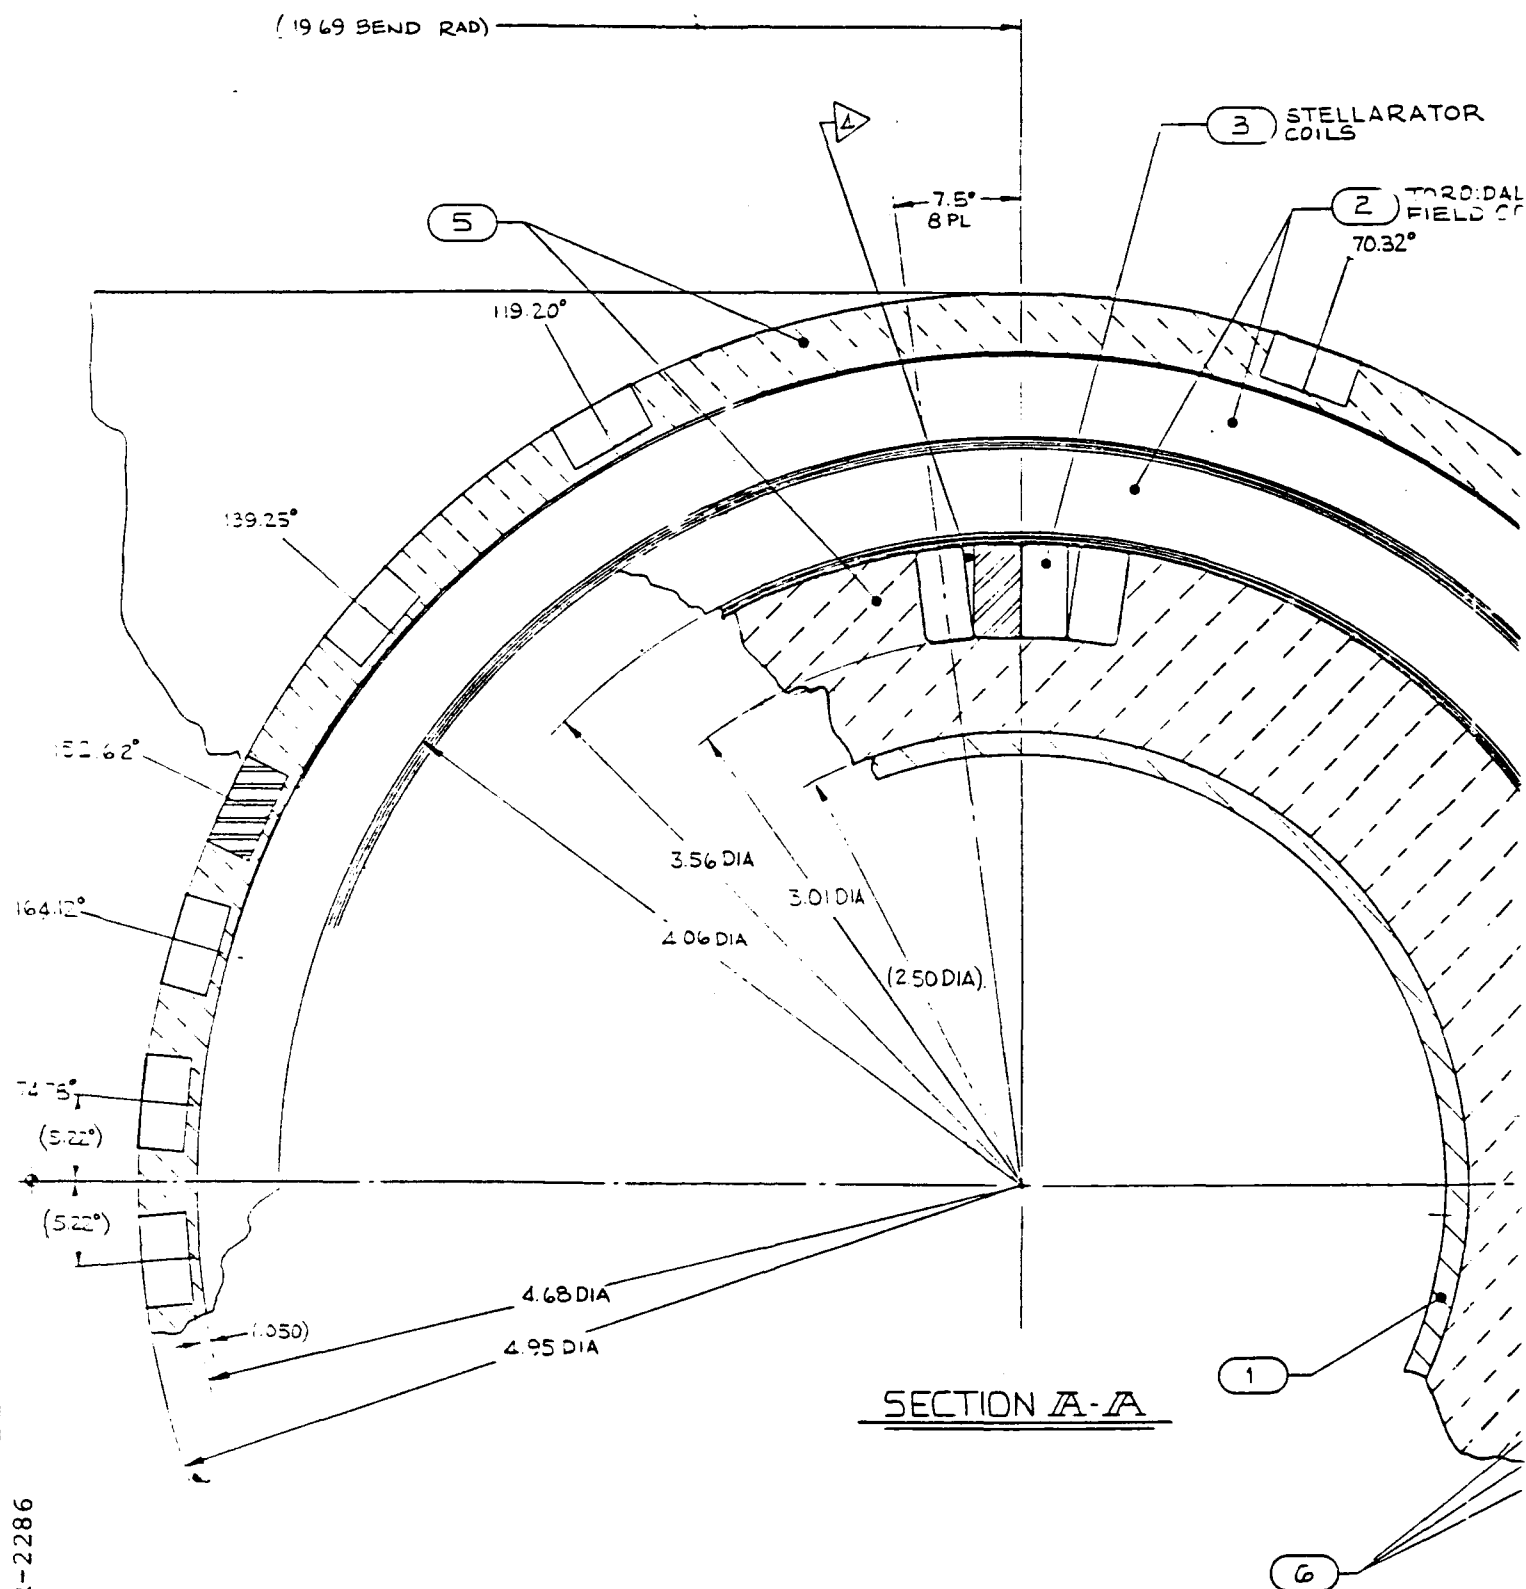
Engineering drawing of the cross-section of the bend magnet, showing the beam pipe and all magnet winding positions.
